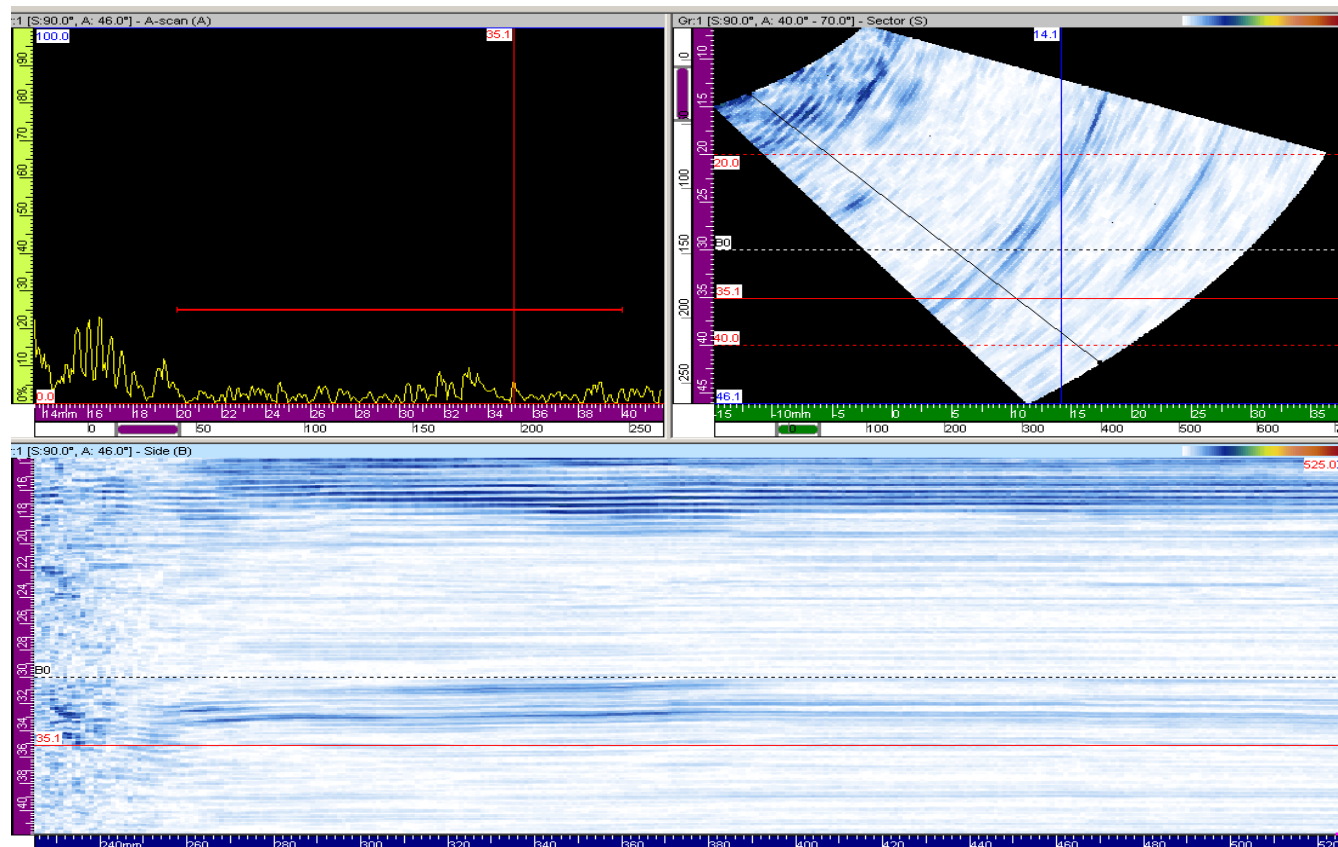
Example scan of base weld of tank WL2R showing no defect indications.
